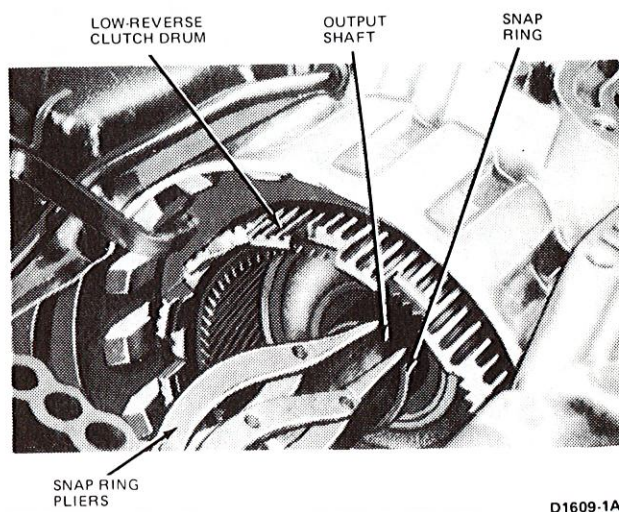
Removing or Installing Reverse Ring Gear Hub, Snap Ring
